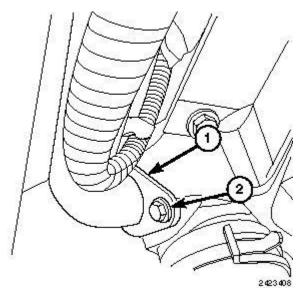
Front Coolant Tube & Bolt Courtesy of CHRYSLER GROUP, LLC
